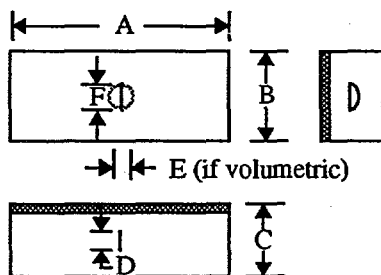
Table of flaw dimensions and block sizes (shown top), drawing of flaw orientation (shown bottom).
